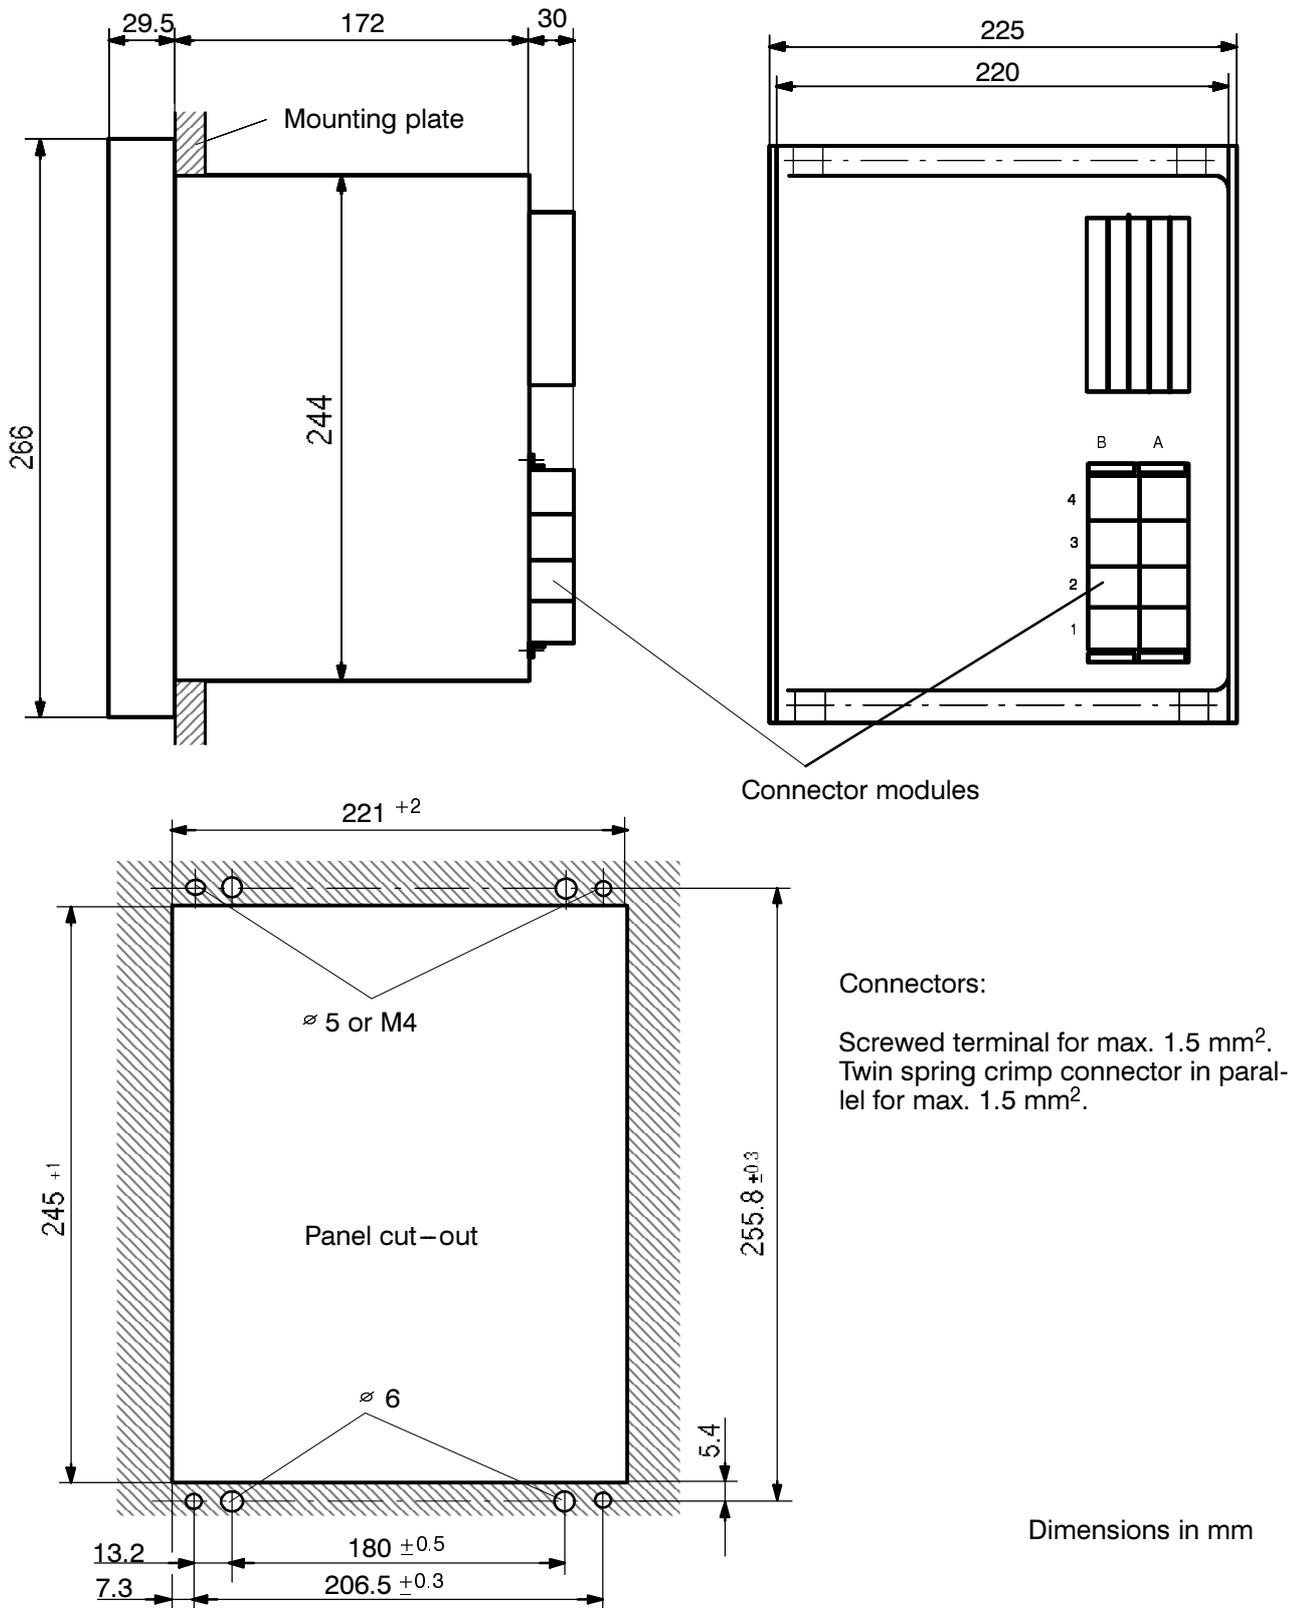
Dimensions of 20 Hz generator, type 7XT3300-0*A00 for panel flush mounting or cubicle installation
